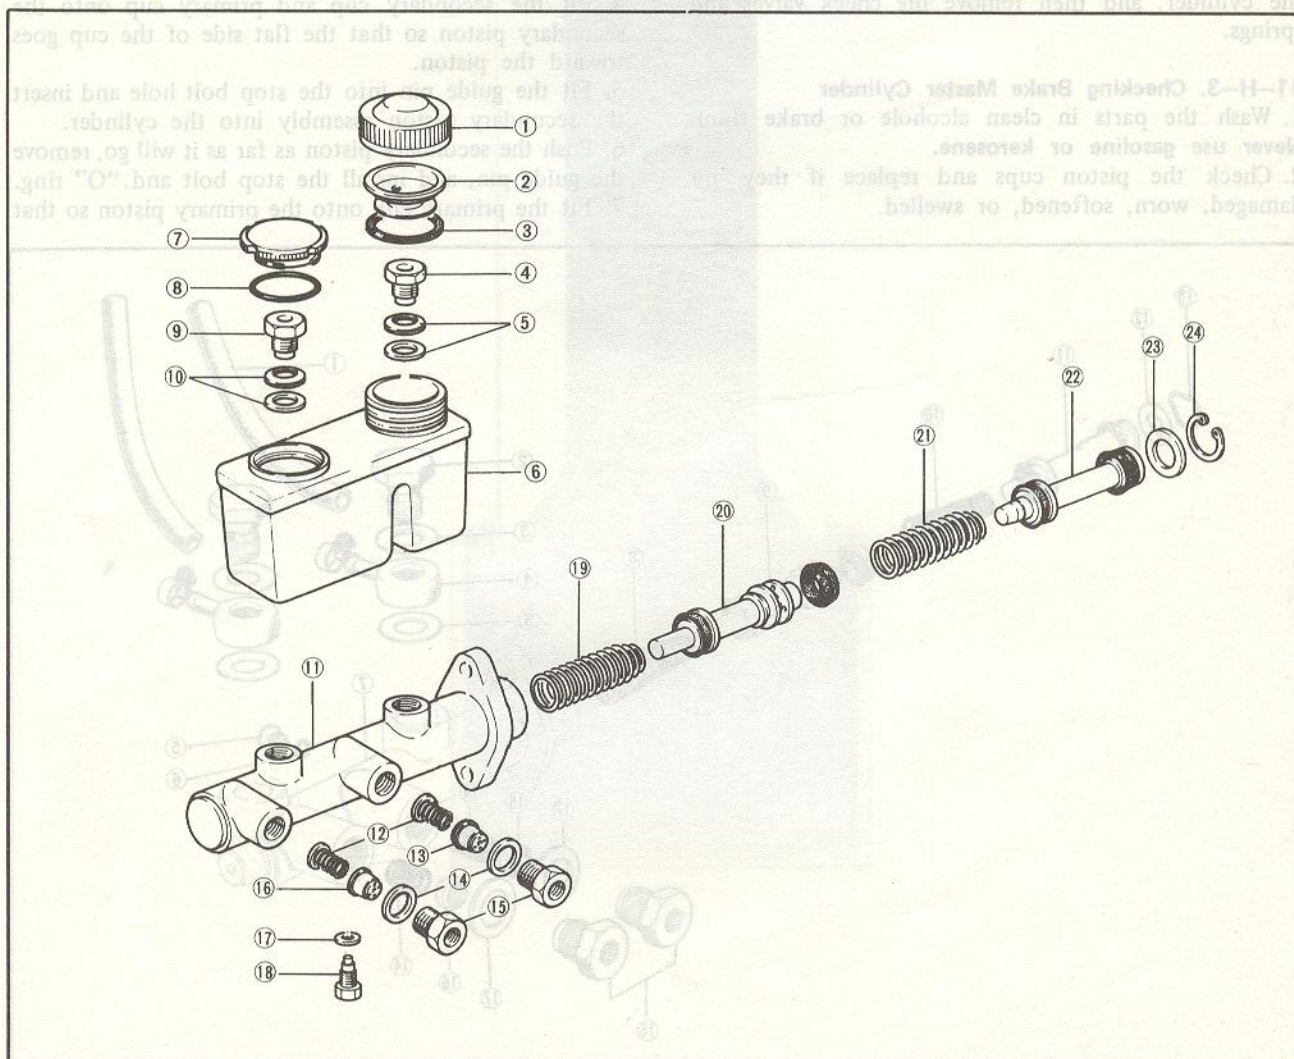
Brake master cylinder components (Right hand drive vehicle)
